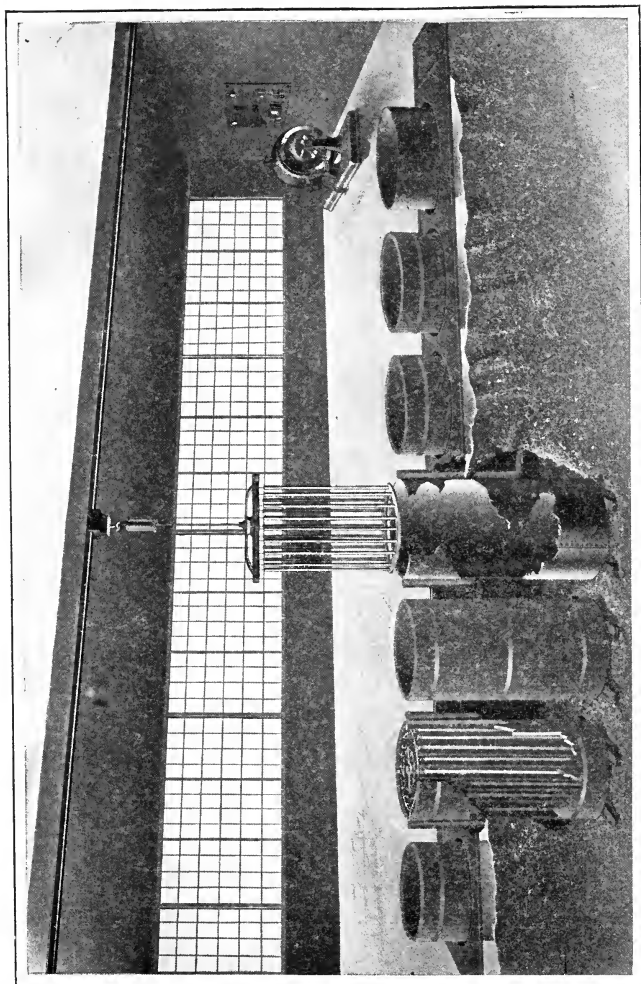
HANSON AND VAN WINKLE PIPE AND TUBE GALVANIZING MACHINE
